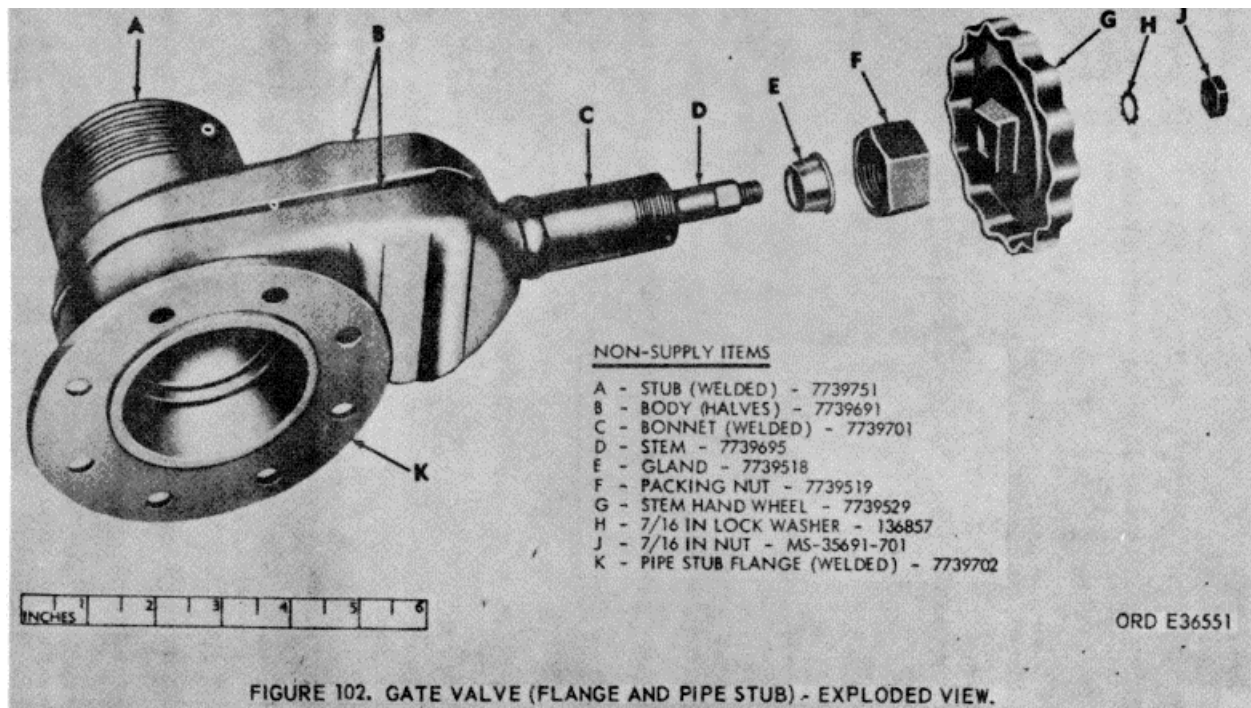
GATE VALVE (FLANGE AND PIPE STUB) - EXPLODED VIEW.
